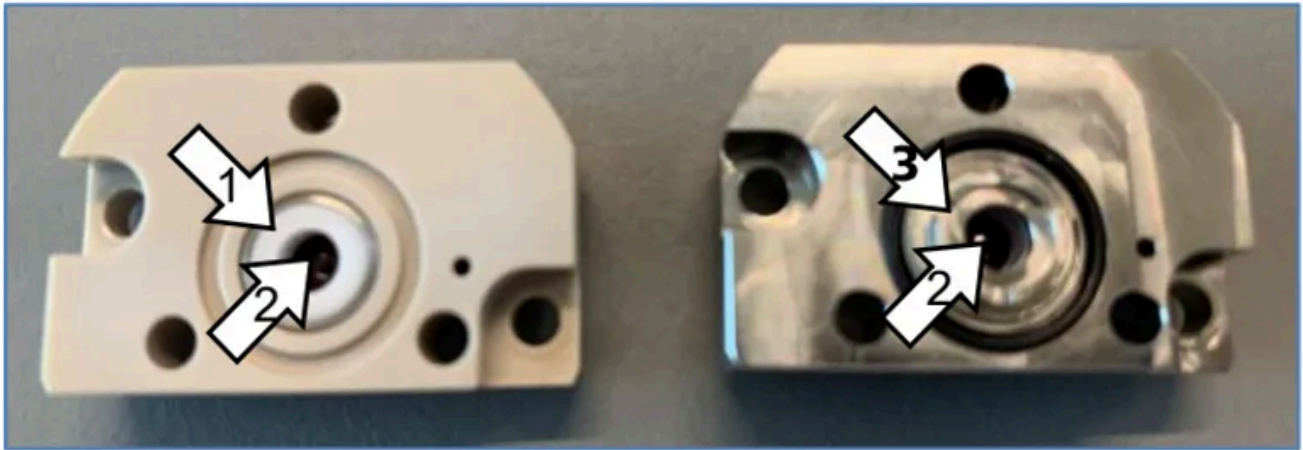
Inner Housing/ Pressure Housing (left = old; right = new)
